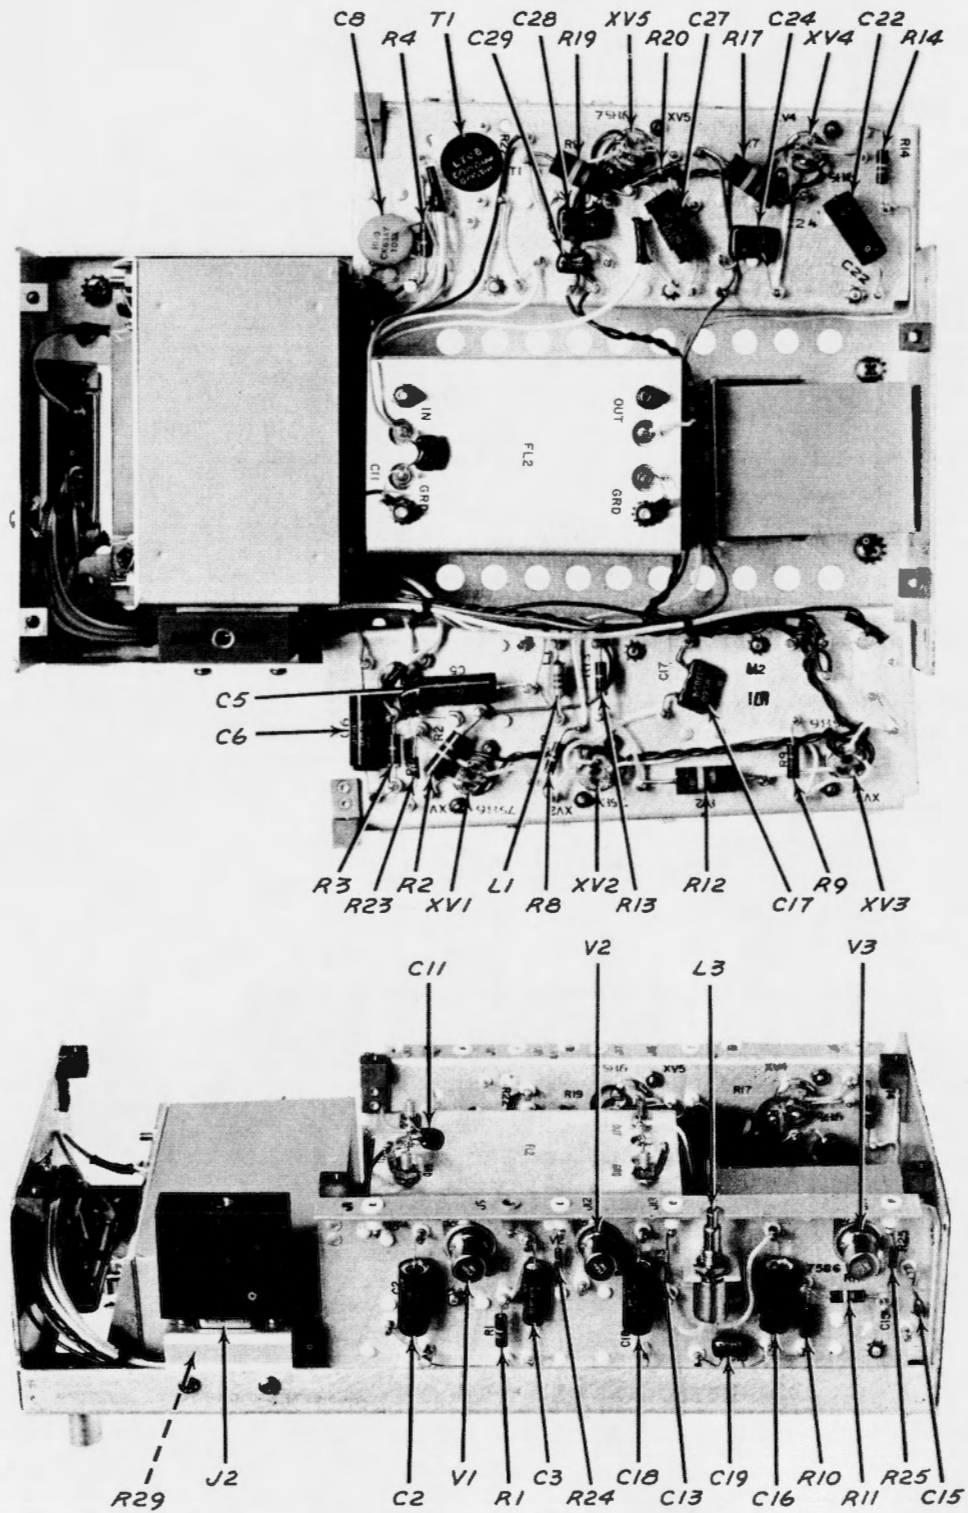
2nd Injector (B) A1A11, Parts Location and Test Points, Disassembled
